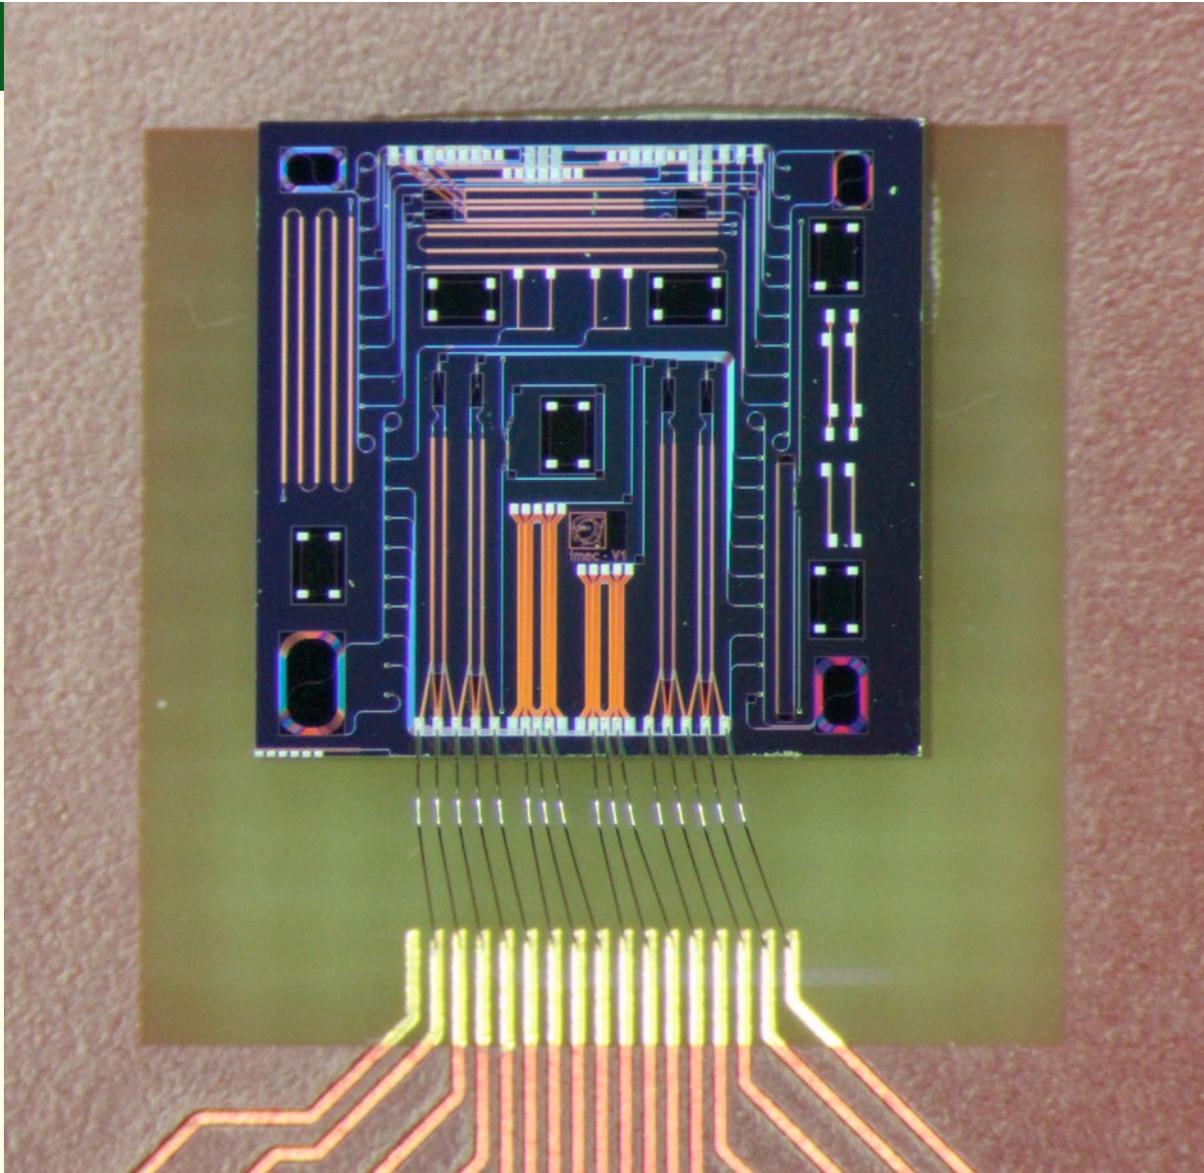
Microscope image of the fully fabricated chip glued onto and bonded to a PCB board for testing purposes.
